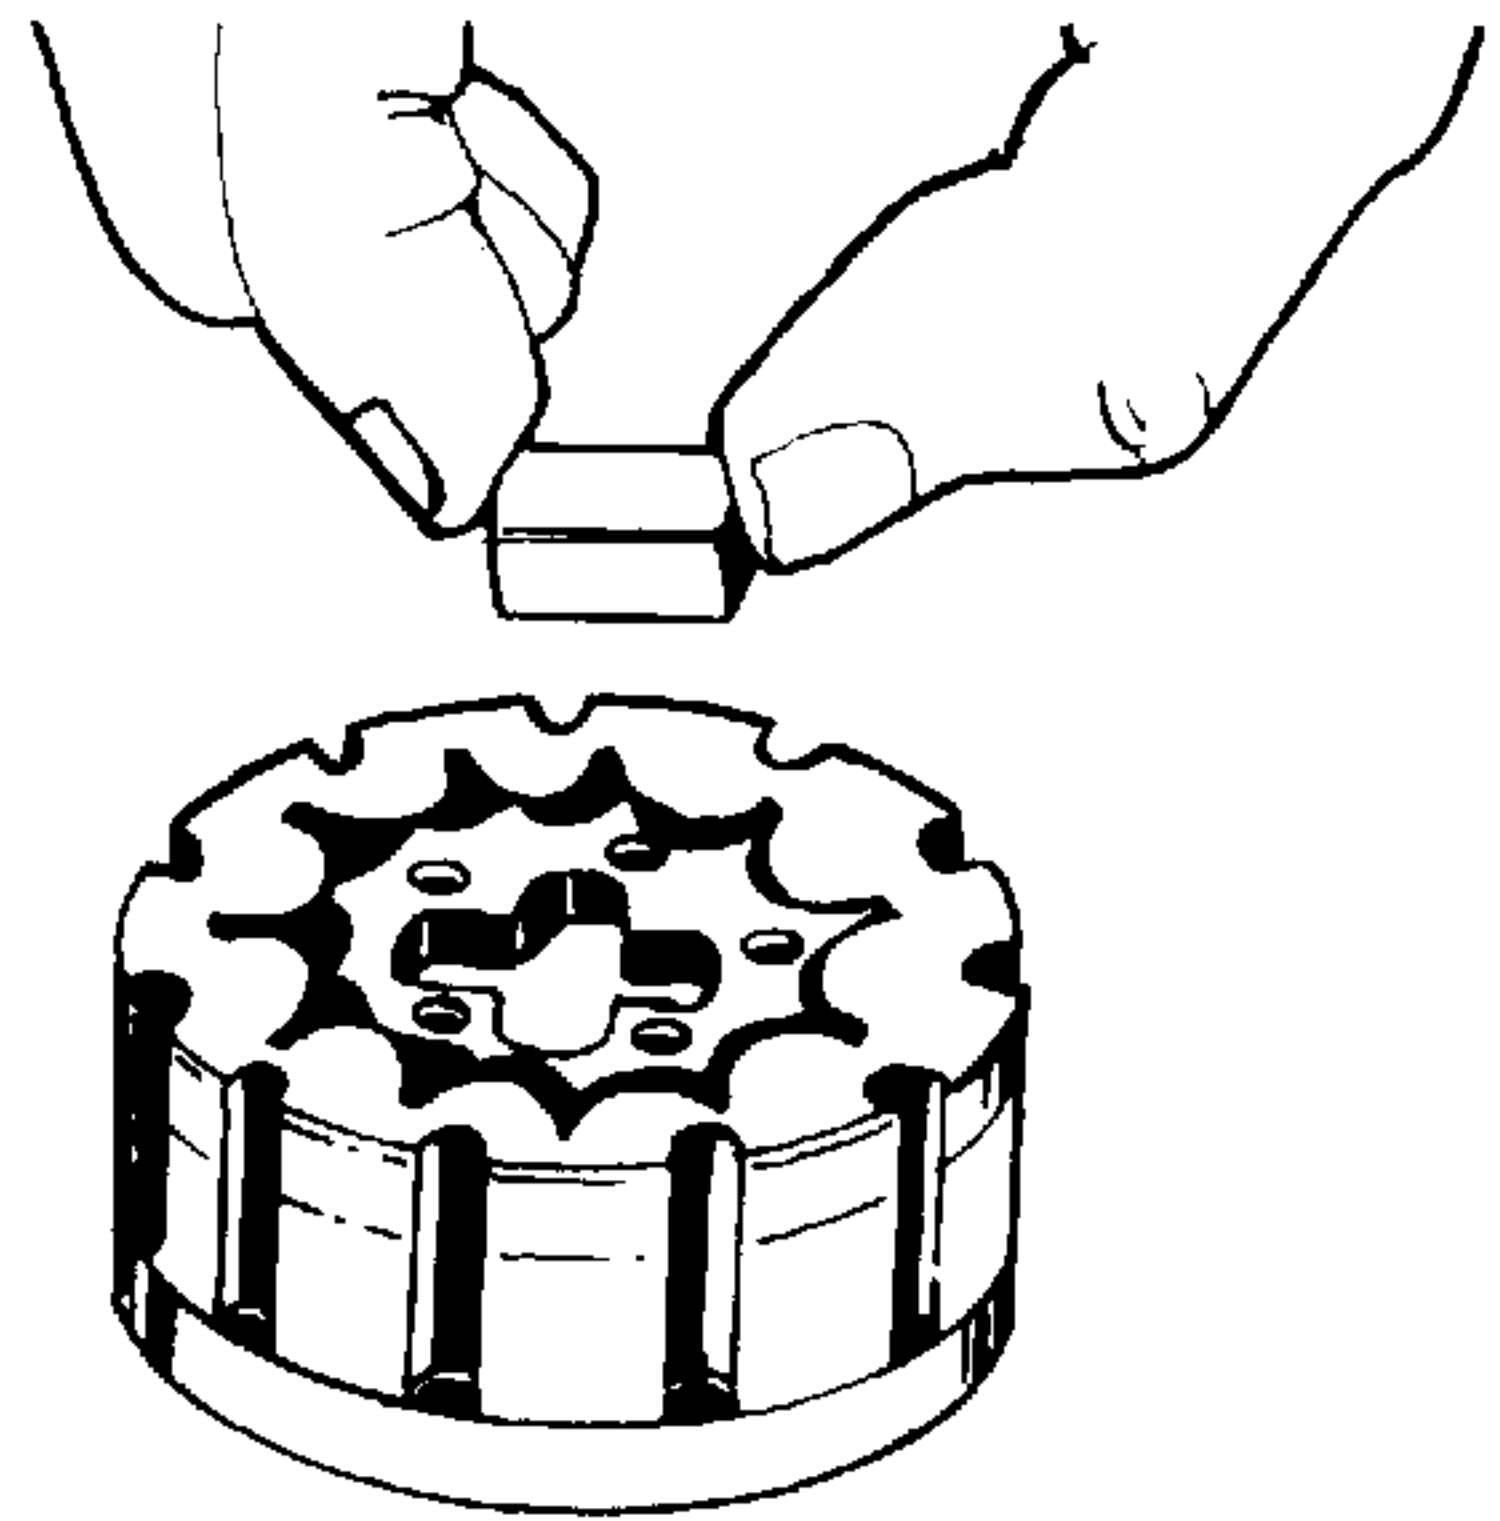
Inserting Drive Link Spacer Into Rotor Drive Slot.
